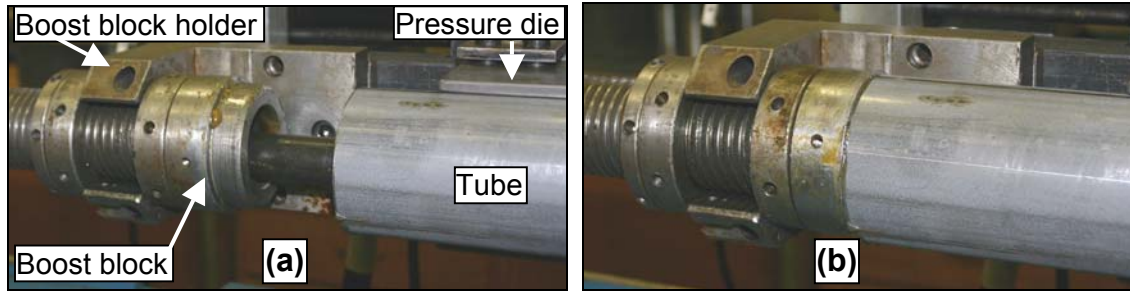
Boost block design: (a) tube retracted; (b) tube engaged with boost block
